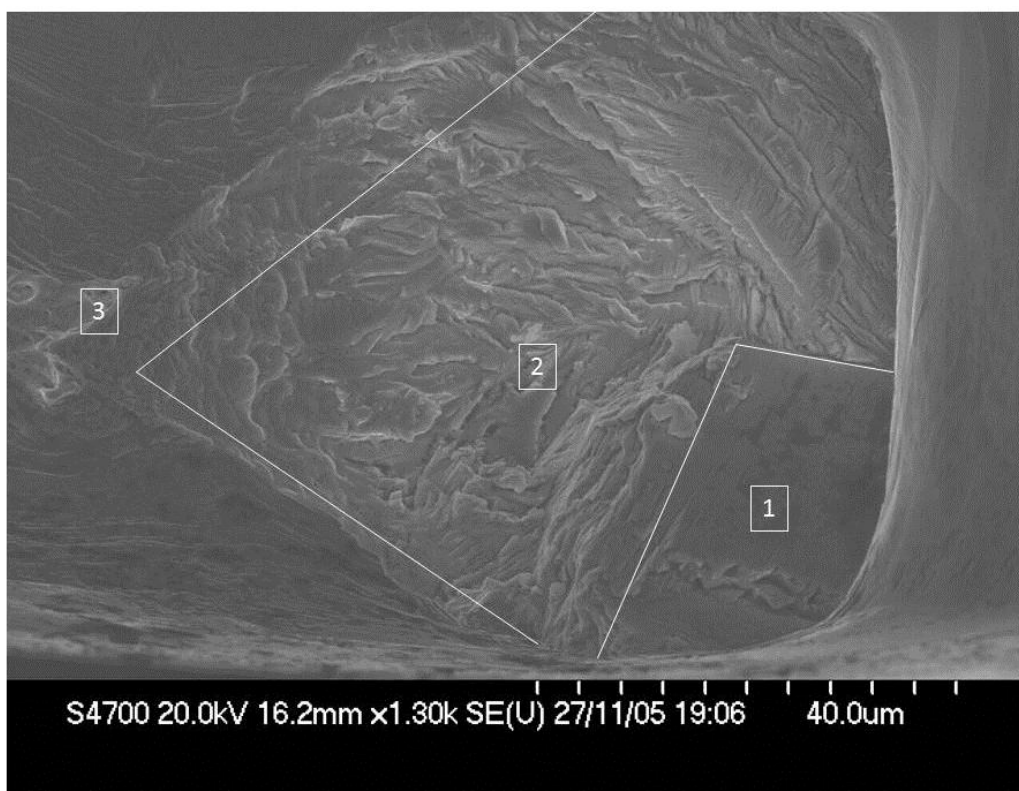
Cleavage-like fracture surface (1) with additional discontinuous crack morphology (2) formed as the crack jumped from slip plane to slip plane before ductile overload (3). 150 μm specimen.
